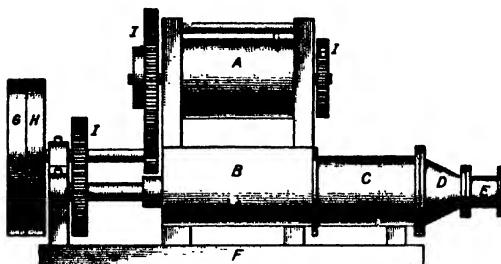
WIRE-CUT BRICKMAKING MACHINE.
